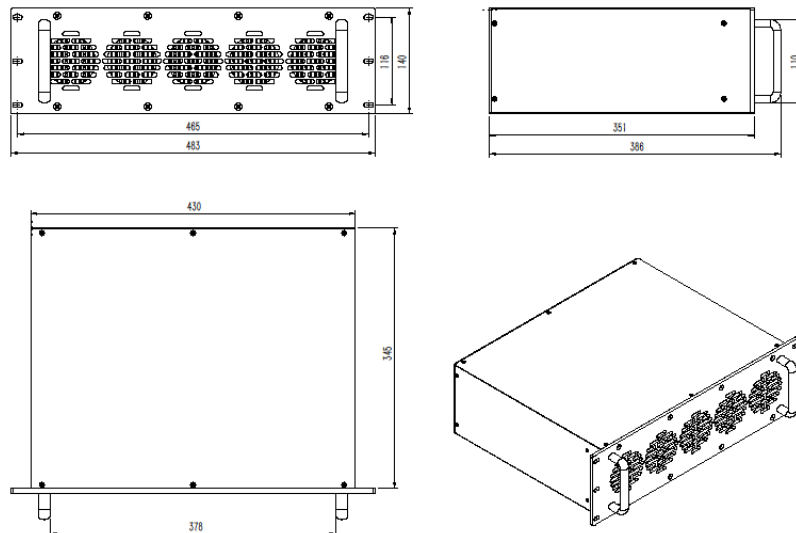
Mechanical Dimension of Fiber Laser Module (Unit: mm)
